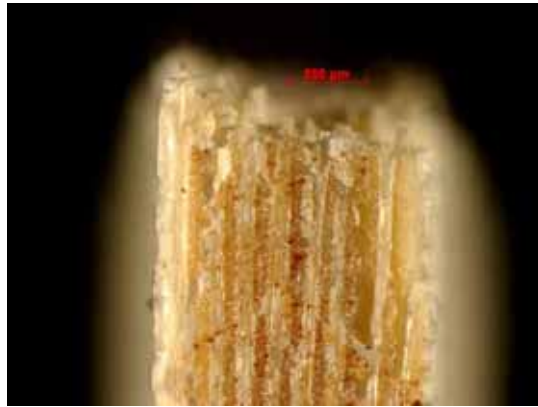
Fracture surface of the N610/Al₂O₃ specimen with 8ply HSW subjected tension to failure in laboratory air at 1100 °C.
